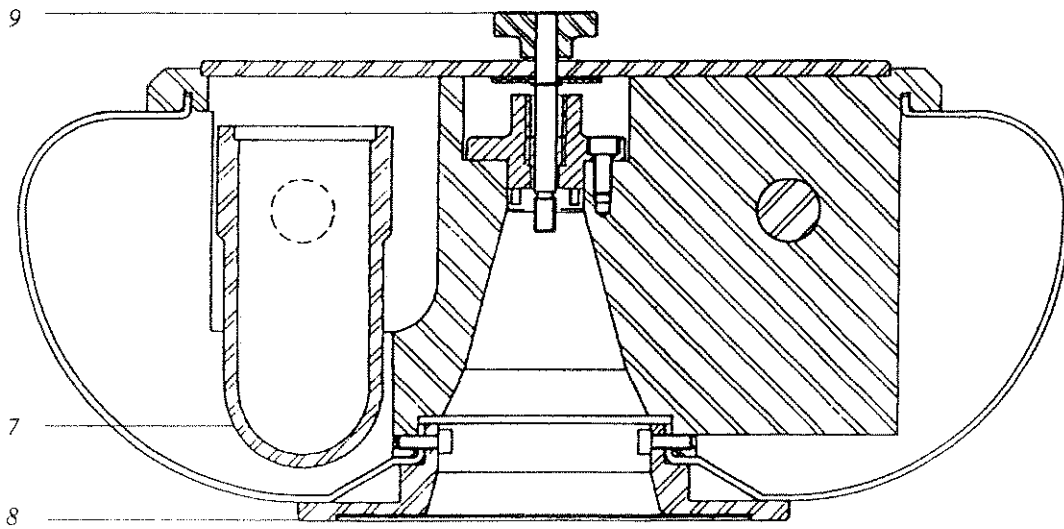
SWING-OUT ROTOR CONSTRUCTION - USER REPLACEABLE PARTS
